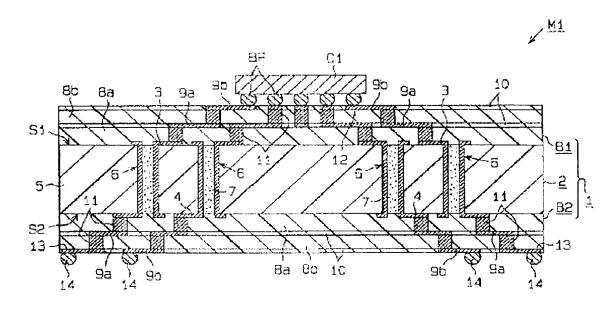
The outline sectional view showing the substrate for electronic-parts loading of an example.
